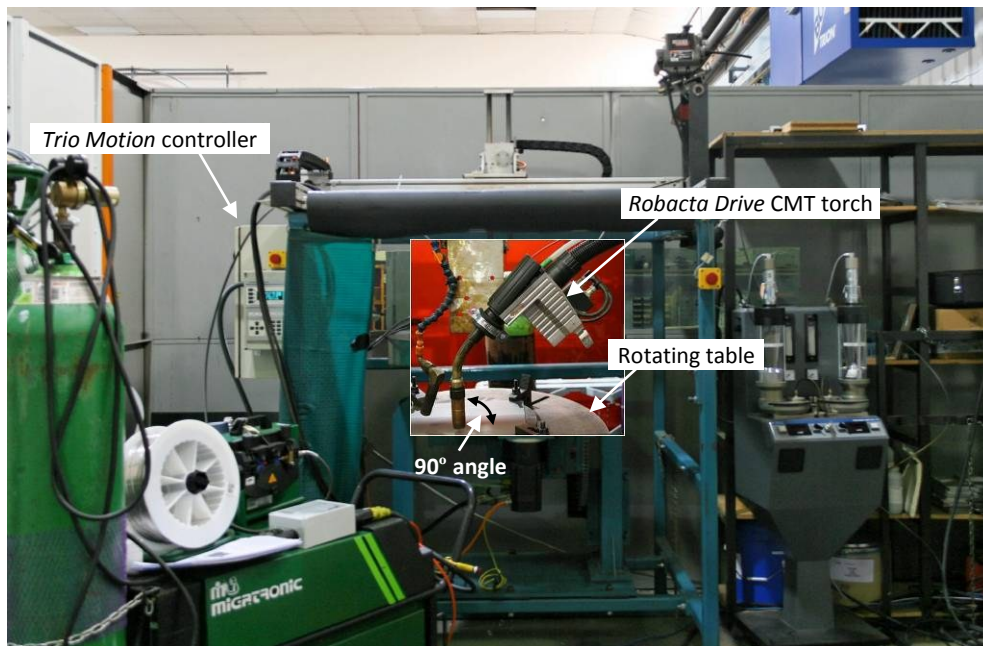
Experimental set-up for the single layer deposition study at the WERC welding laboratory. The 5-axis *Trio Motion* rig is coupled with the *Robacta Drive* CMT welding torch (inset).
